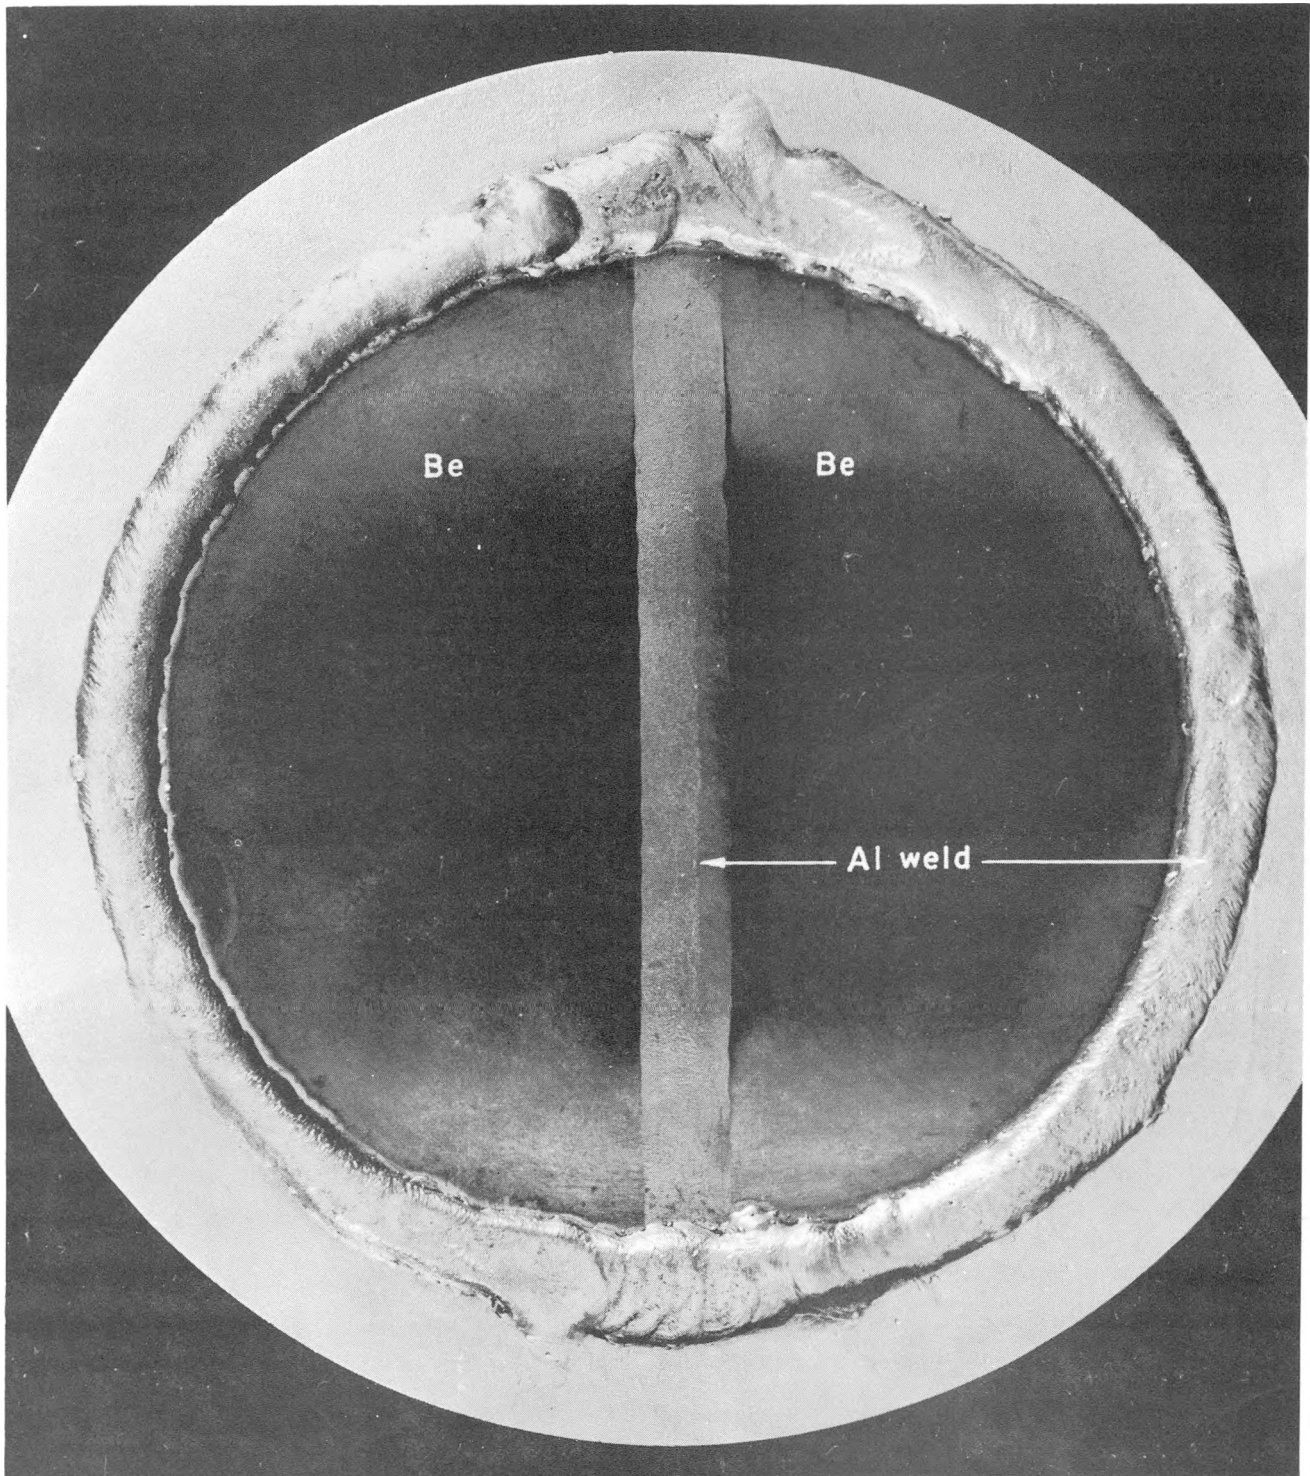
WELDING SEQUENCE FOR SPECIMEN No. Be 80,  $\frac{1}{2}$  IN. THICK
